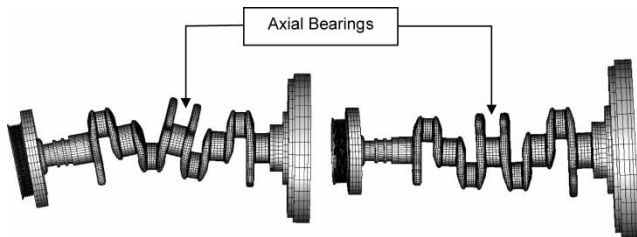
Large-scaled crankshaft deformations at CAP1 and CAP2
